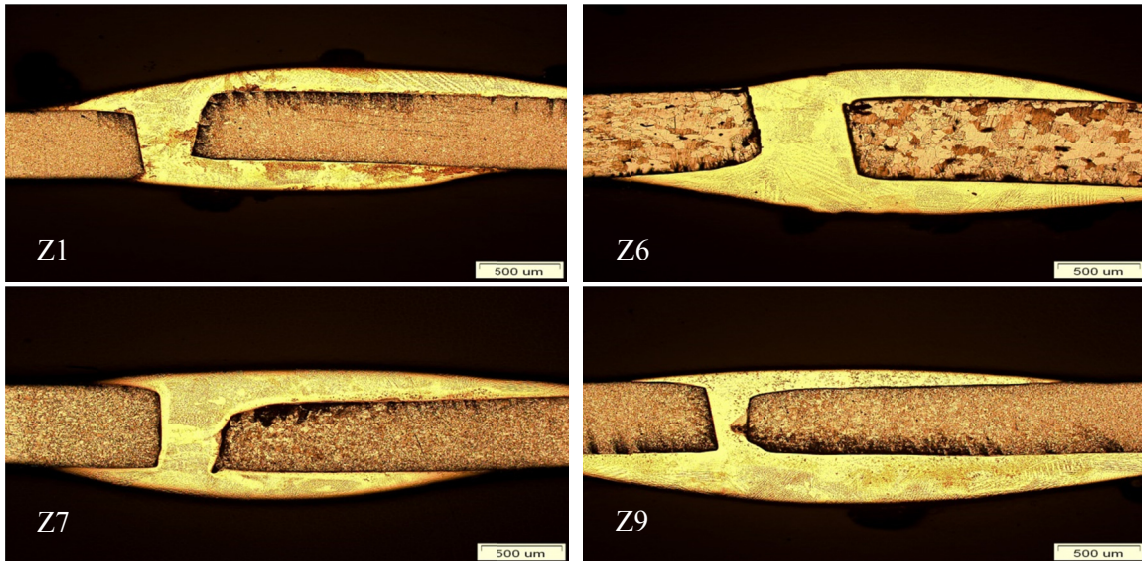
Macrostructure of the TIG braze welded butt joints made using the CuSi3Mn1 braze; etchant: Nital + FeCl₃
